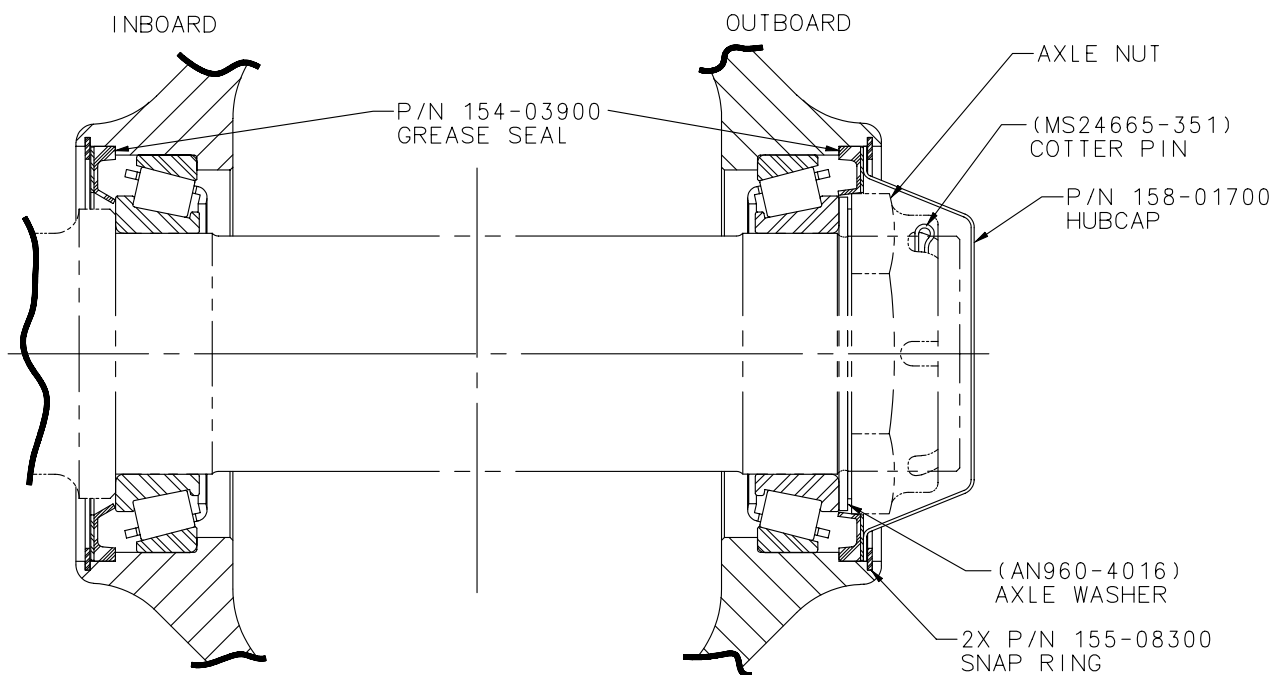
40-279 AND 40-279A WHEEL ASSEMBLIES
